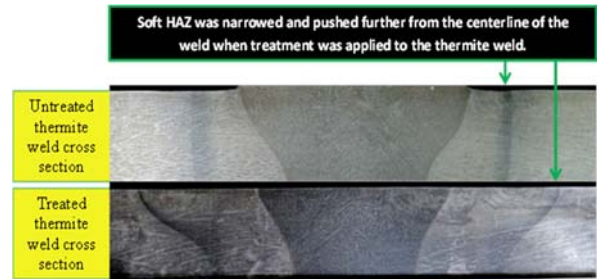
Image showing Narrowed Soft HAZ of a Treated Thermite Weld
